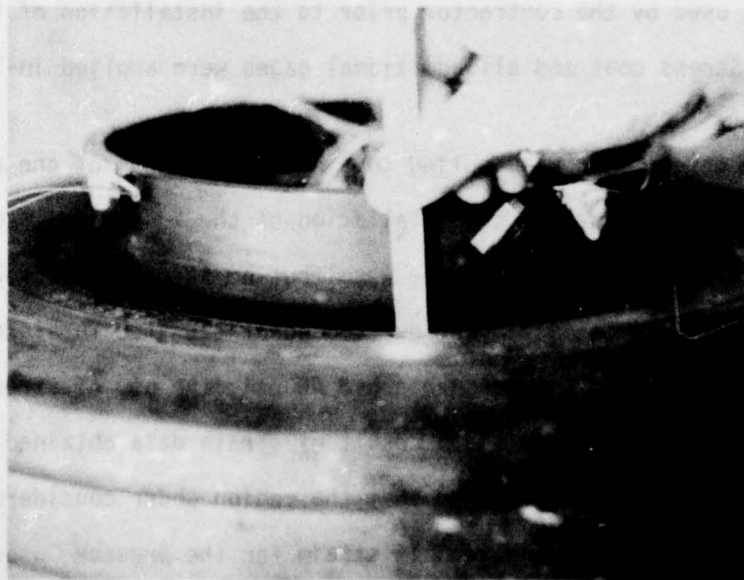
Gap Remaining After Wheel Halves Were Bolted Together
